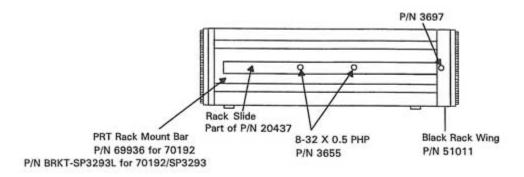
Mounting Rack Slide and Black Rack Wing
